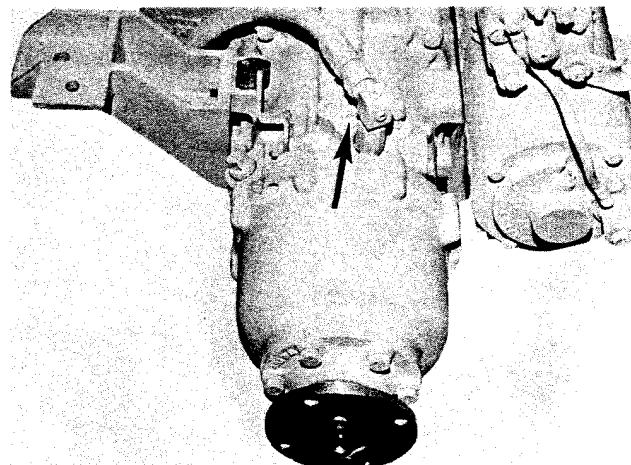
A, (V11937). Borg Warner marine gear pressure check point
